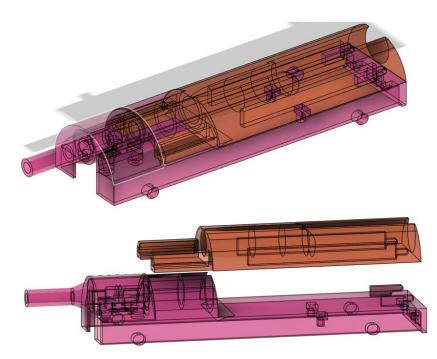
The method of attaching the holder to the electronic housing uses hooks, receptors, and rods.
